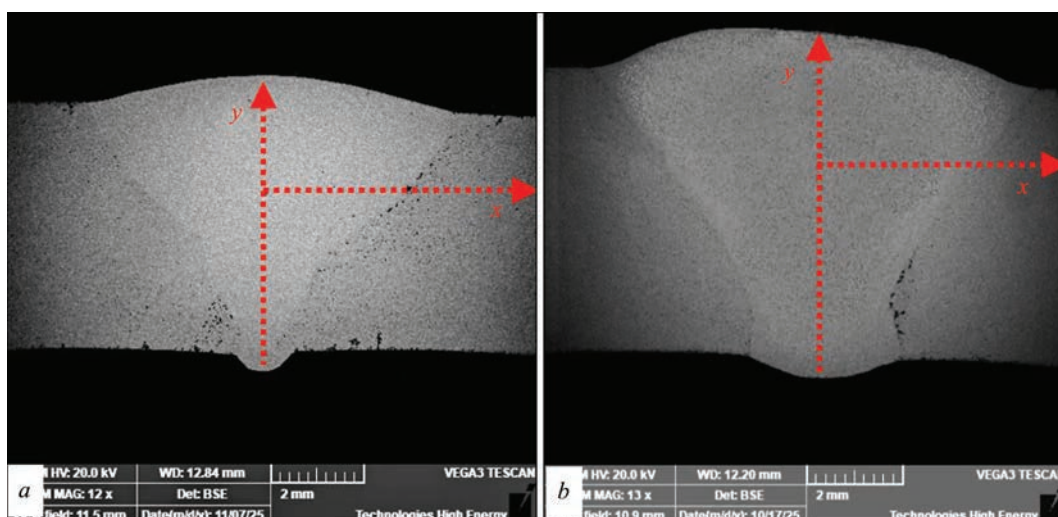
Shape of penetration of armor steel welded joints with marked directions of microhardness measurement: *a* — Armox 500T steel; *b* — Mars 600 steel
